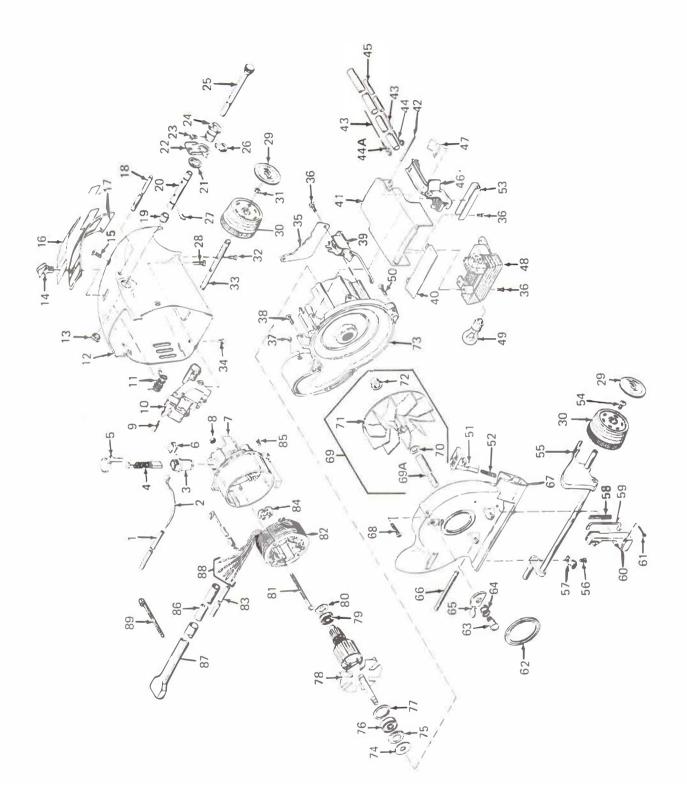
HERITAGE Models 1HD and 1HC motor group exploded view
